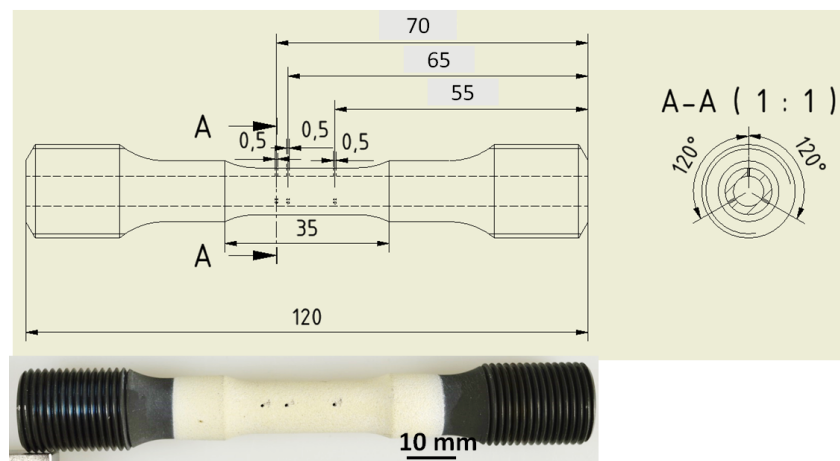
Sketch of the laser-drilled cooling holes in a LCF specimen.
